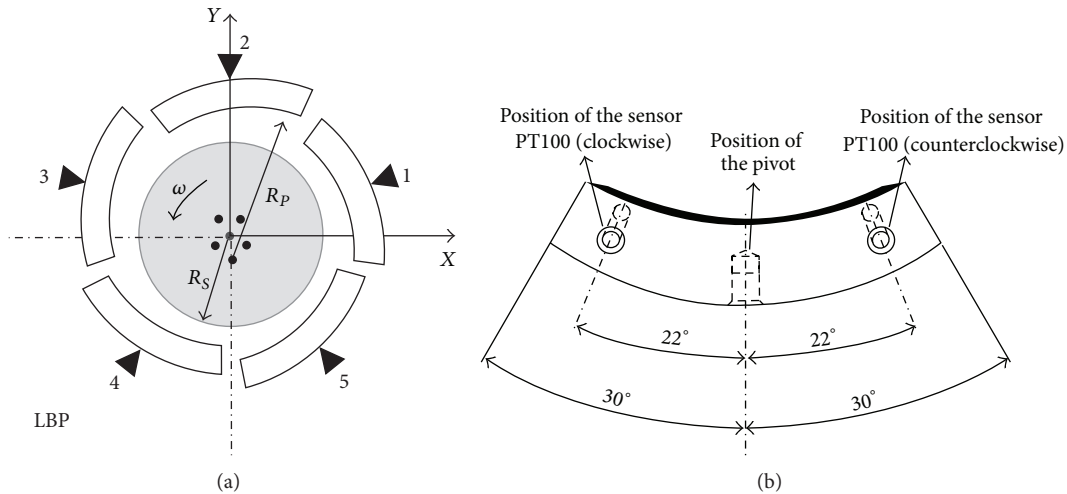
Schematic representation of the bearing and the pad: (a) tilting pad bearing with 5 pads; (b) pad of the bearing.
